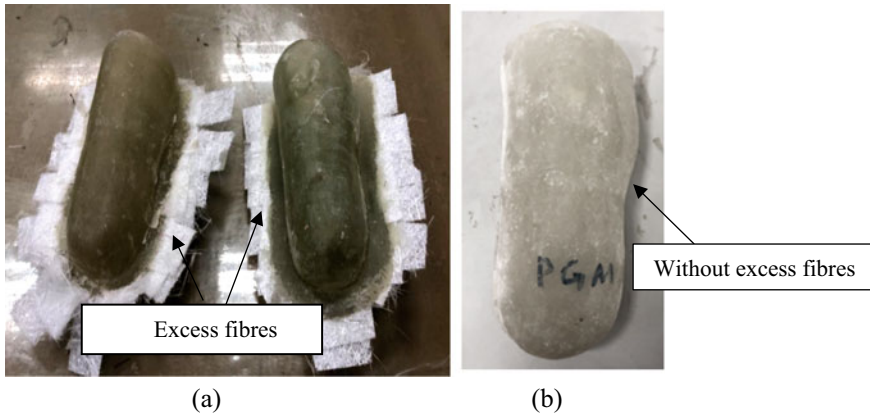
Prosthetic leg socket made from fibreglass mat with polyester resin condition after removed from mould: a before trimming to size and b after trimming to size
